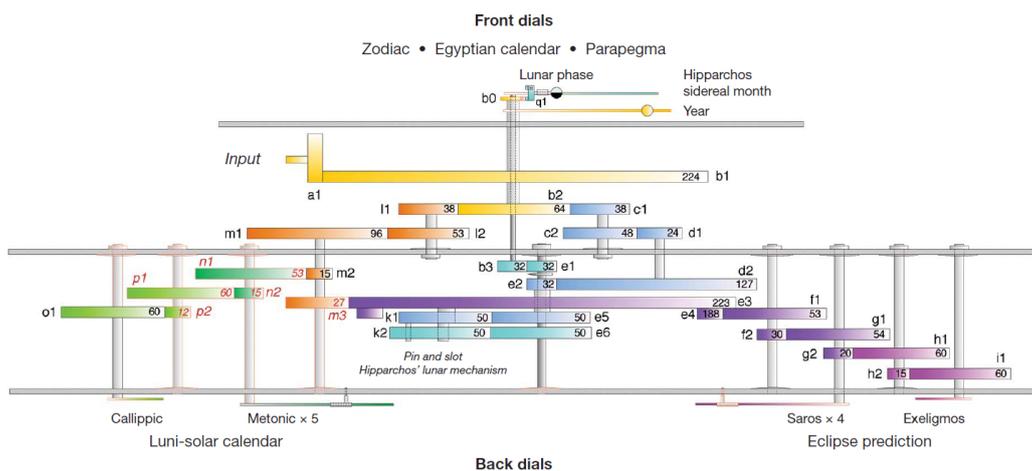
This is a scheme of the Mechanism's gears, viewed from the side. Every rectangle is a gear, with every letter corresponding to an axis, and coaxial gears being enumerated front-to-back, i.e. gear b1 is closer to the front than gear b2. [10]
